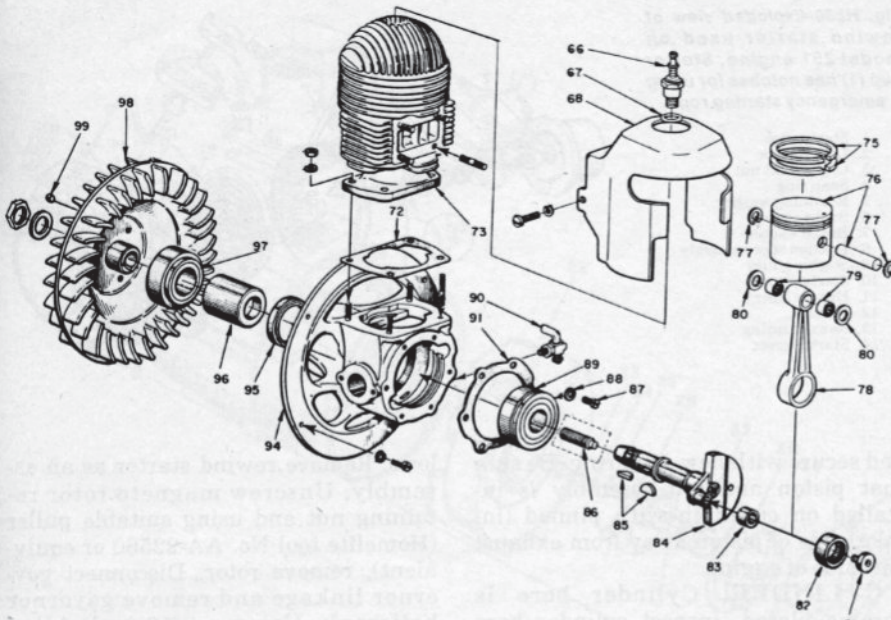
Exploded view showing model 251 engine crankcase, cylinder, rod and piston assembly, fan, crankshaft (output end) and related parts. Petcock (90) is to drain crankcase should it become flooded with fuel; do not attempt to start and run engine with petcock open.
